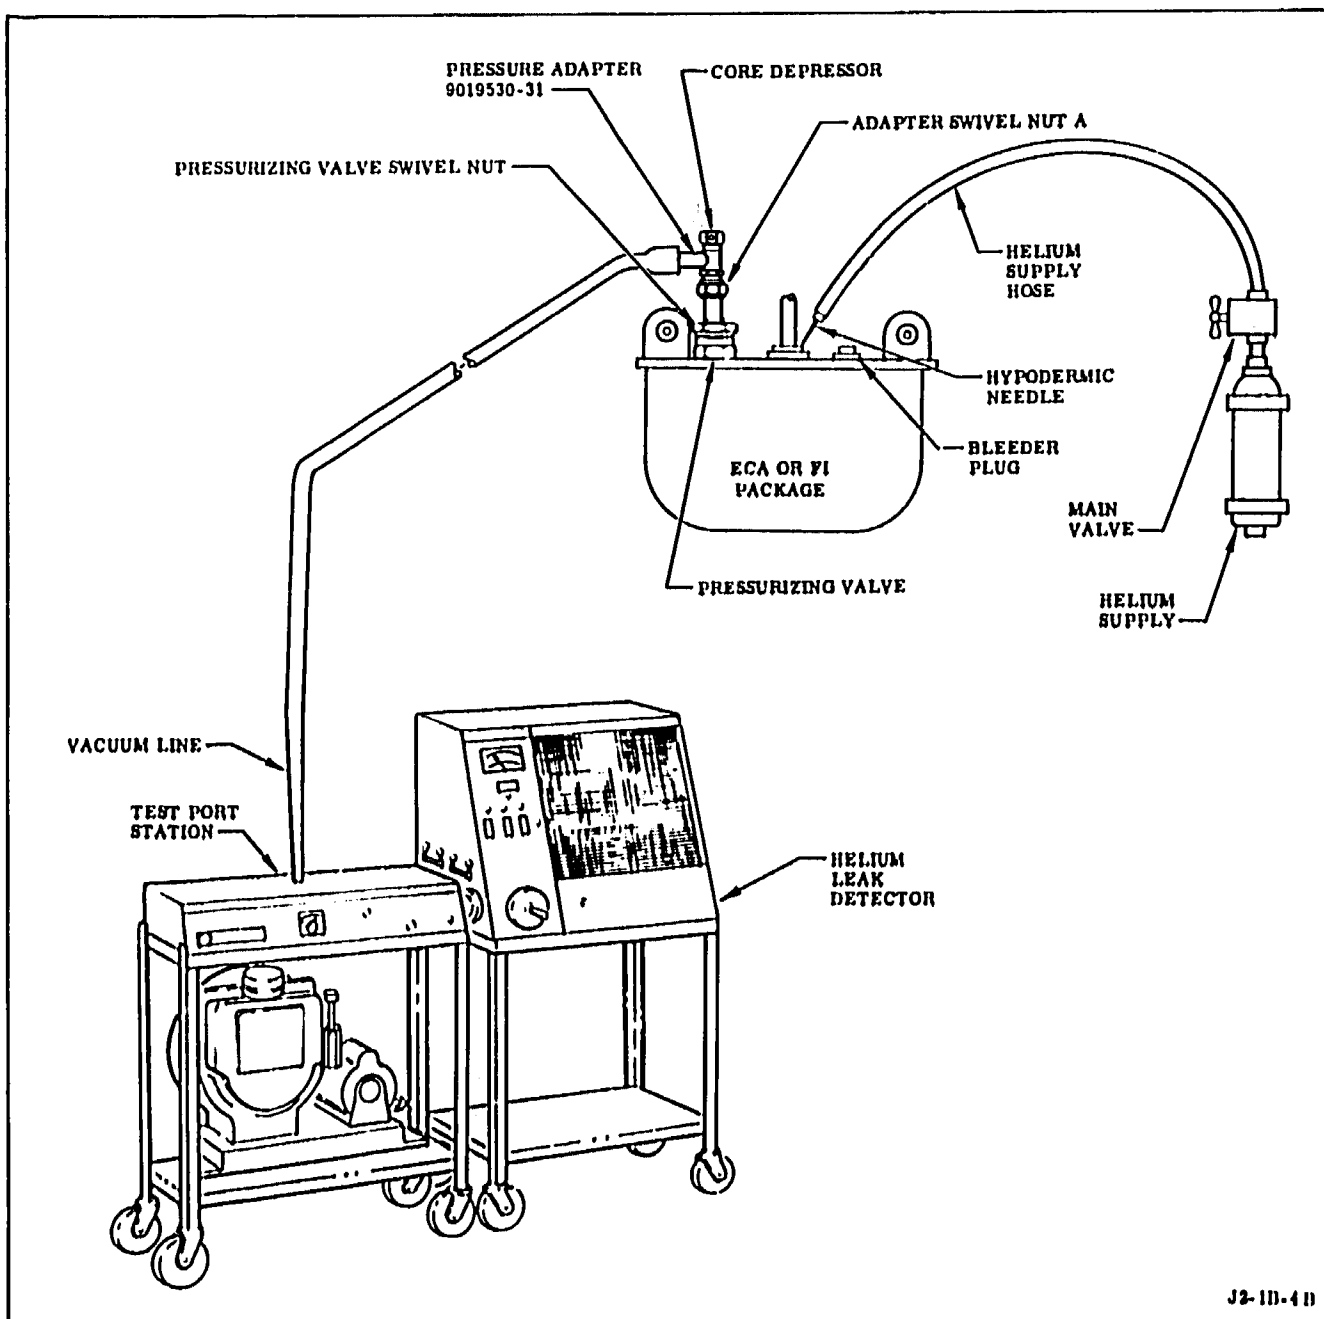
Leak-Testing Electrical Control Assembly and Flight Instrumentation Packages
